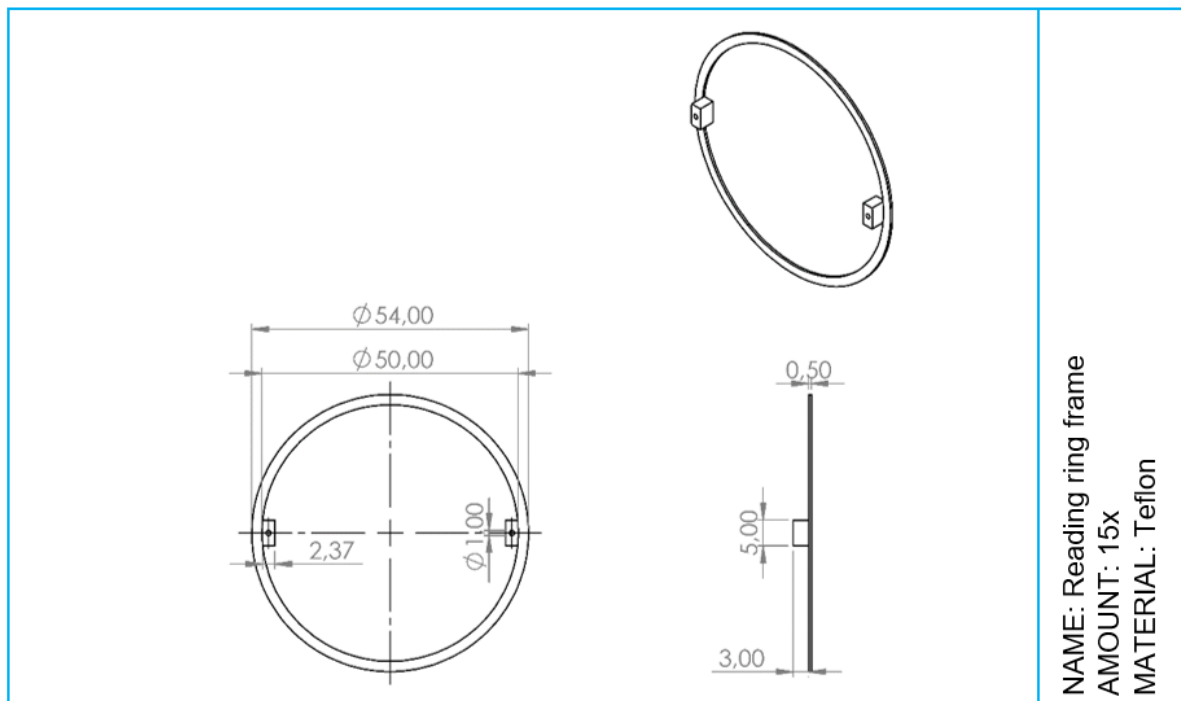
Construction drawings of the reading ring frame rings in between - Machined prototype
